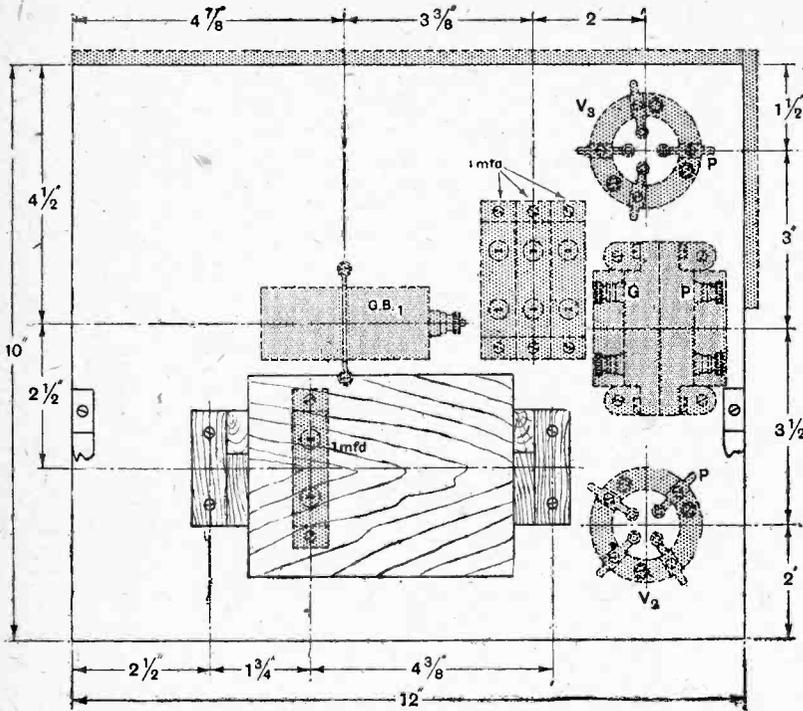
Layout of parts on the baseboard, which is of 1/2 in. wood.
